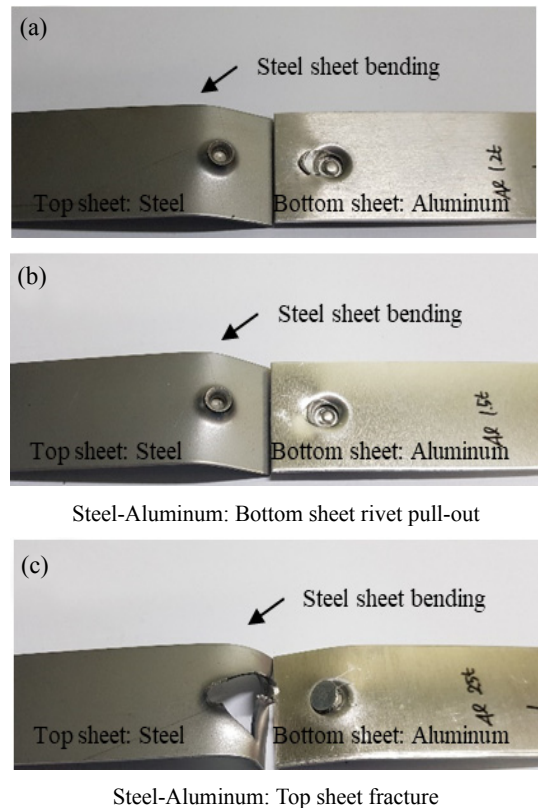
Fracture modes for SPR joints samples: (a) Al5052-H32 1.2 mm, (b) Al5052-H32 1.5 mm and (c) Al5052-H32 2.5 mm
